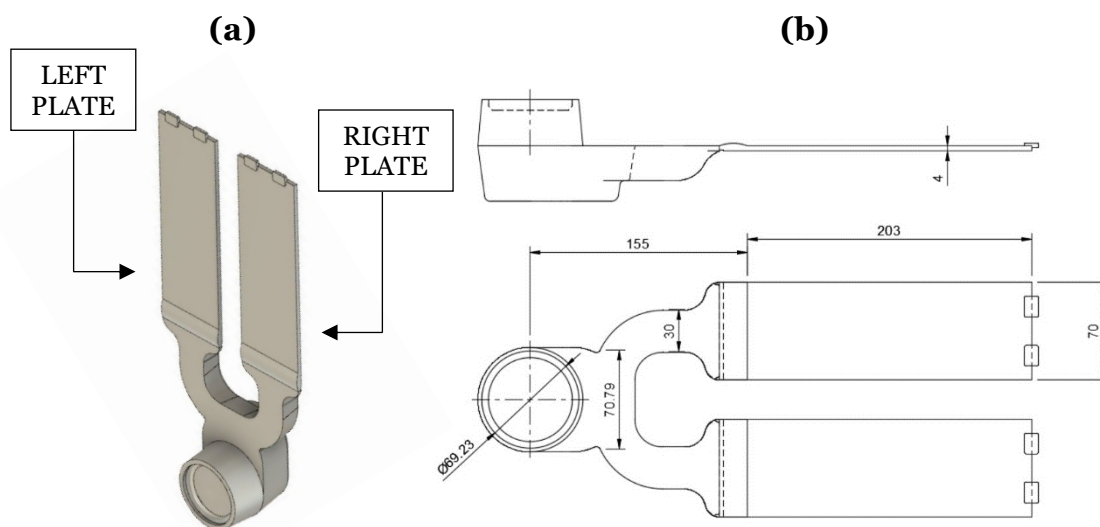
(a) CAD model of the casted part, the left and right plates has been distinguished; (b) 2D drawing of the part with measurements.
